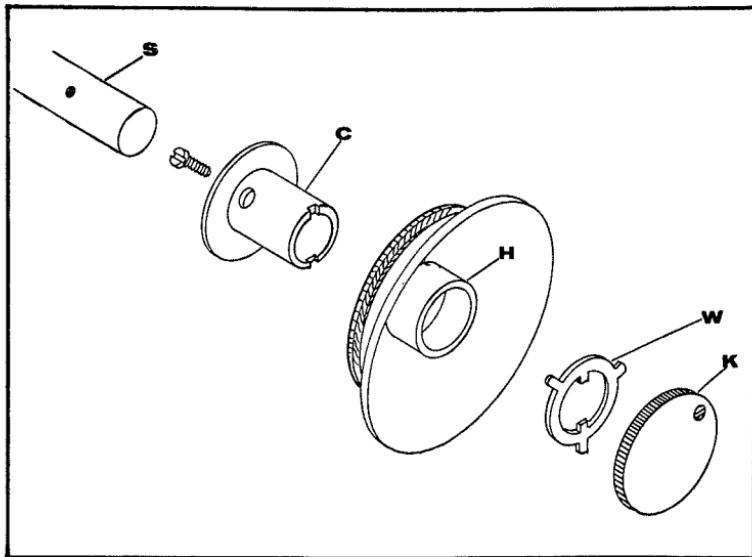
Since it is never desirable to run the machine mechanisms while winding a bobbin, some way will be provided to disengage these mechanisms. This sketch is developed from a rather old machine, but even your recent model may have an arrangement similar to it for disengaging the main drive shaft from the drive pulley.
